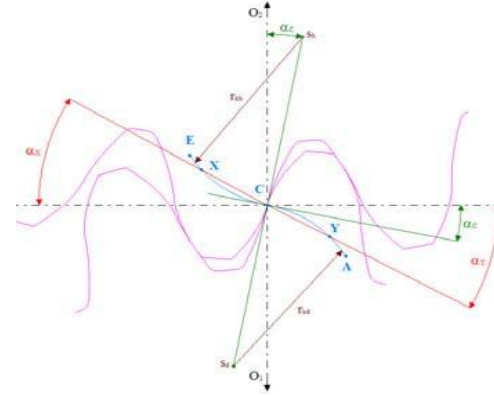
Basic geometrical parameters of the C-C gearing [4]
